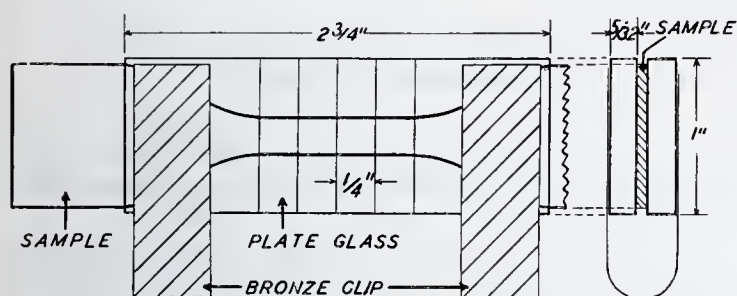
SPECIMEN HOLDER OF GLASS PLATES HELD TOGETHER WITH BRONZE CLIPS
